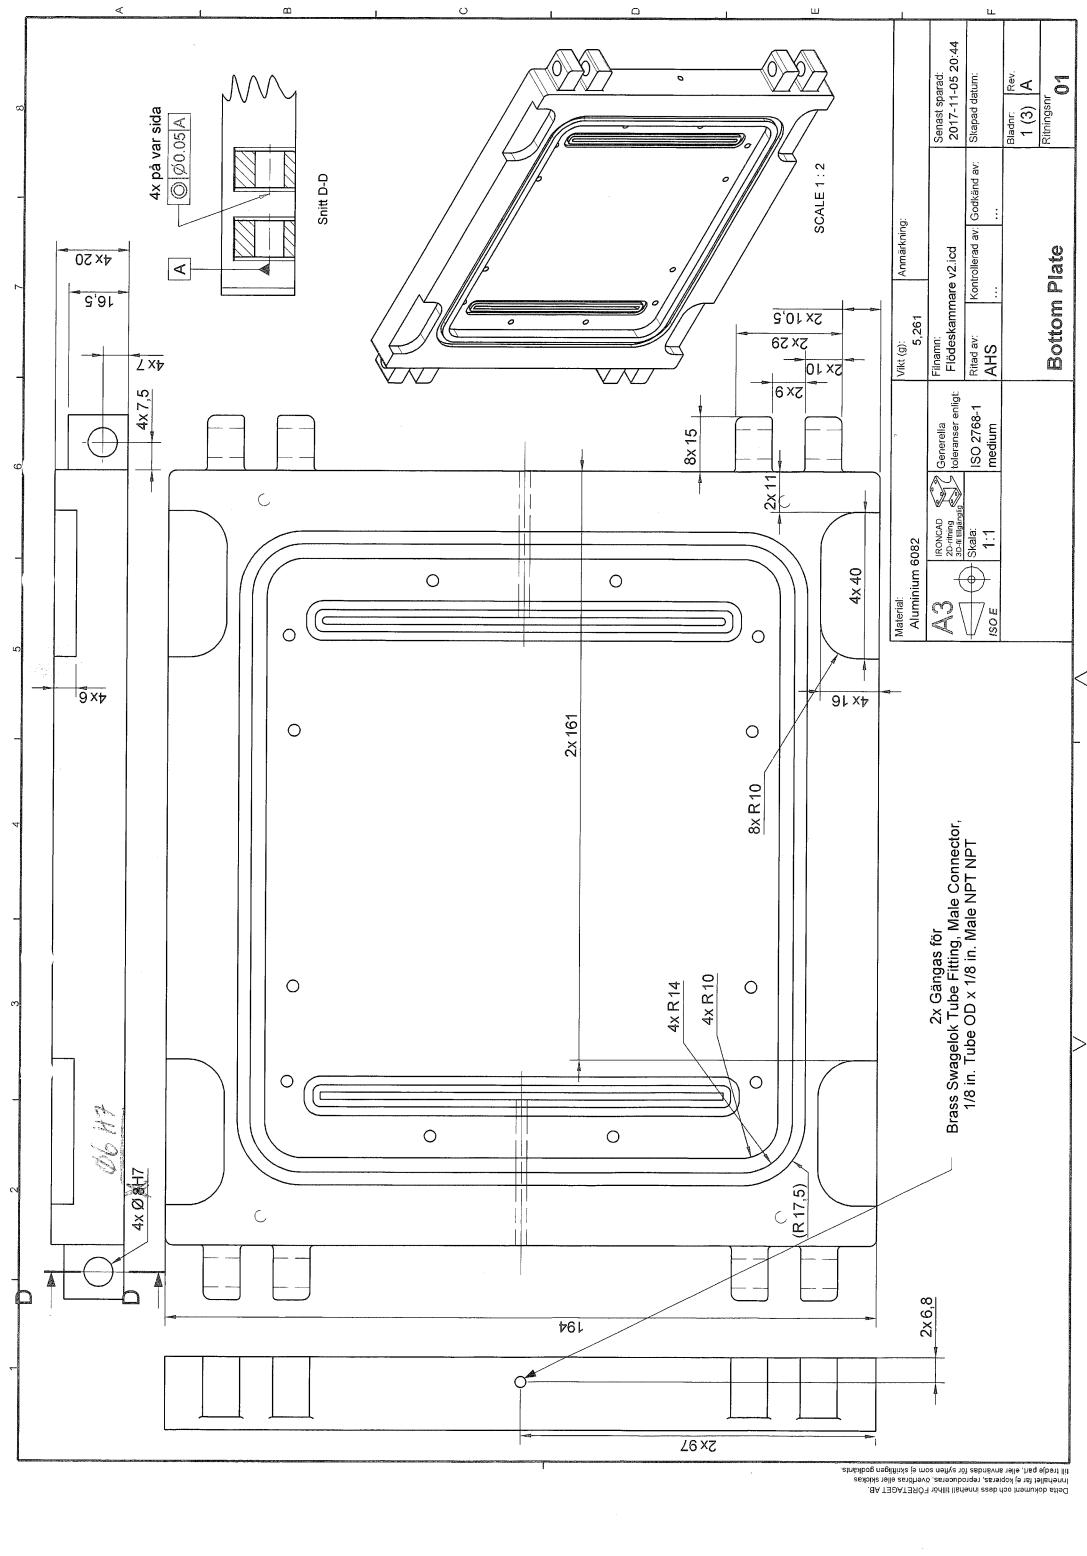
Technical drawing 1 (of 3) of the SVA chamber body. Distances are given in mm.
